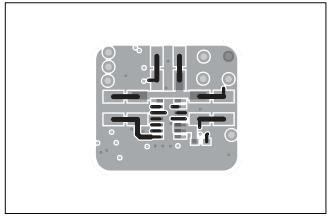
MAX30101 Daughter Board Component Placement Guide—Solder Side
